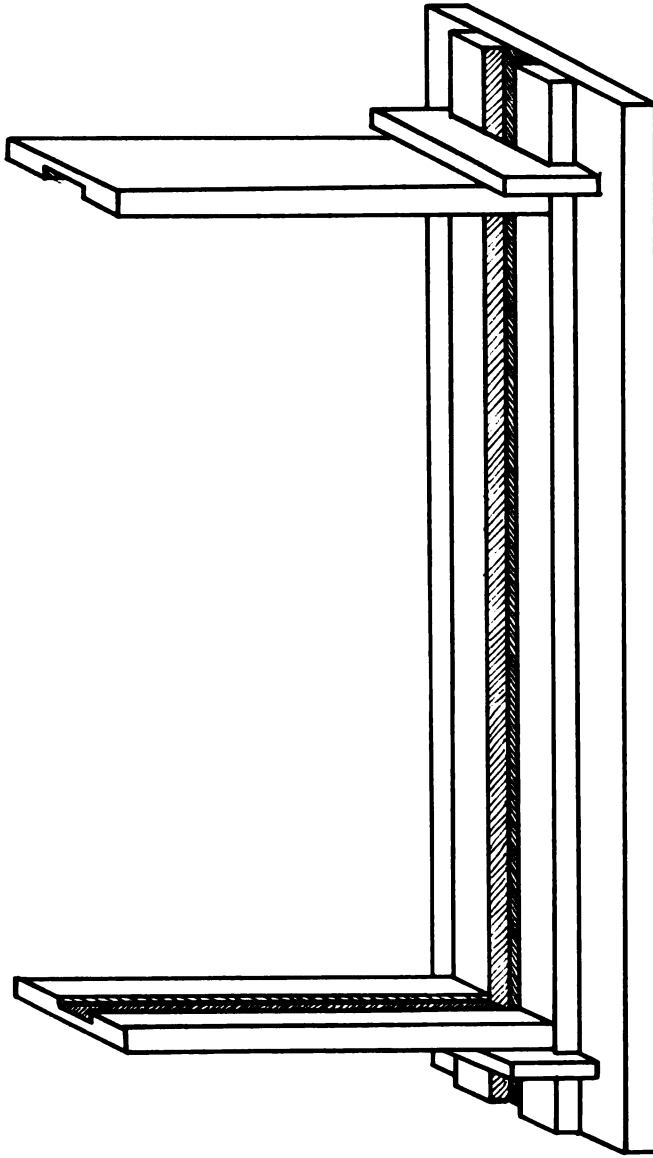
Arrangement for welding of frame joints.
